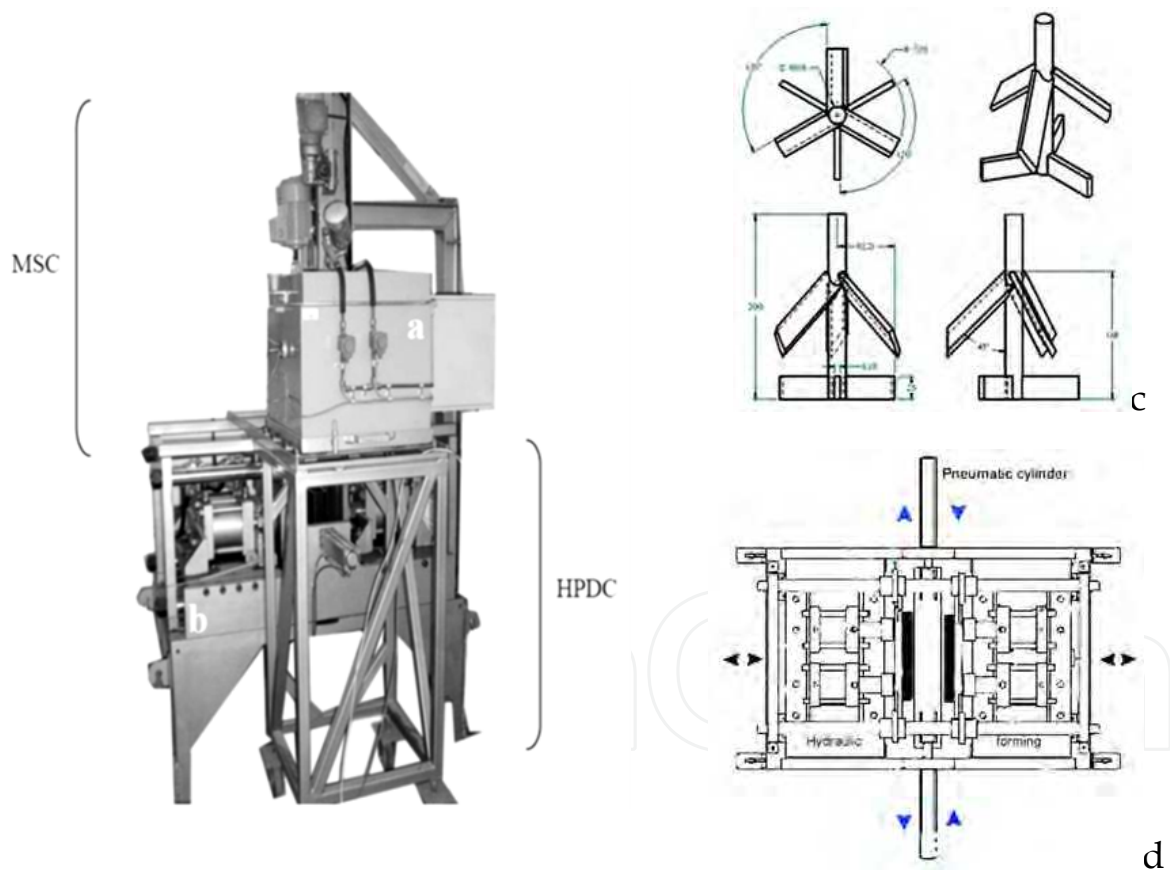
MSC&HPDC device: (a, c) Mechanical stir casting unit; (b, d) High pressure die casting (shaping) unit.
